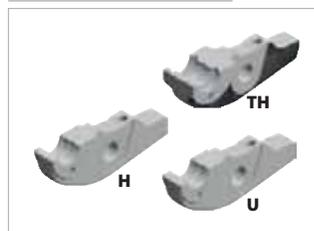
DETAIL OF THE SLEEVE - DETAILS - МАРКИРОВКА ГИЛЬЗЫ
